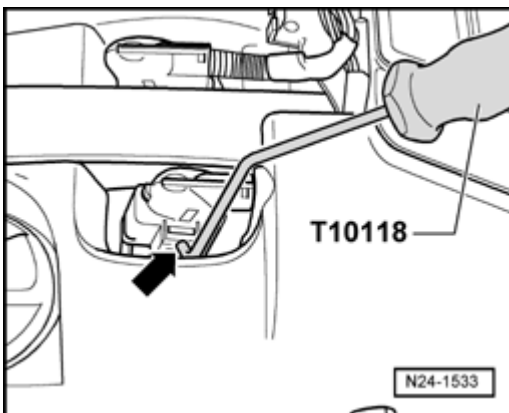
Identifying Assembly Tool T10118 On Release Button
